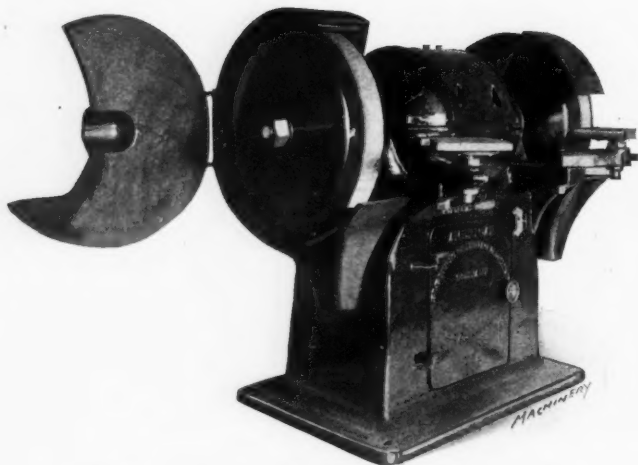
American Electric Grinder showing Arrangement of Wheel Guards
